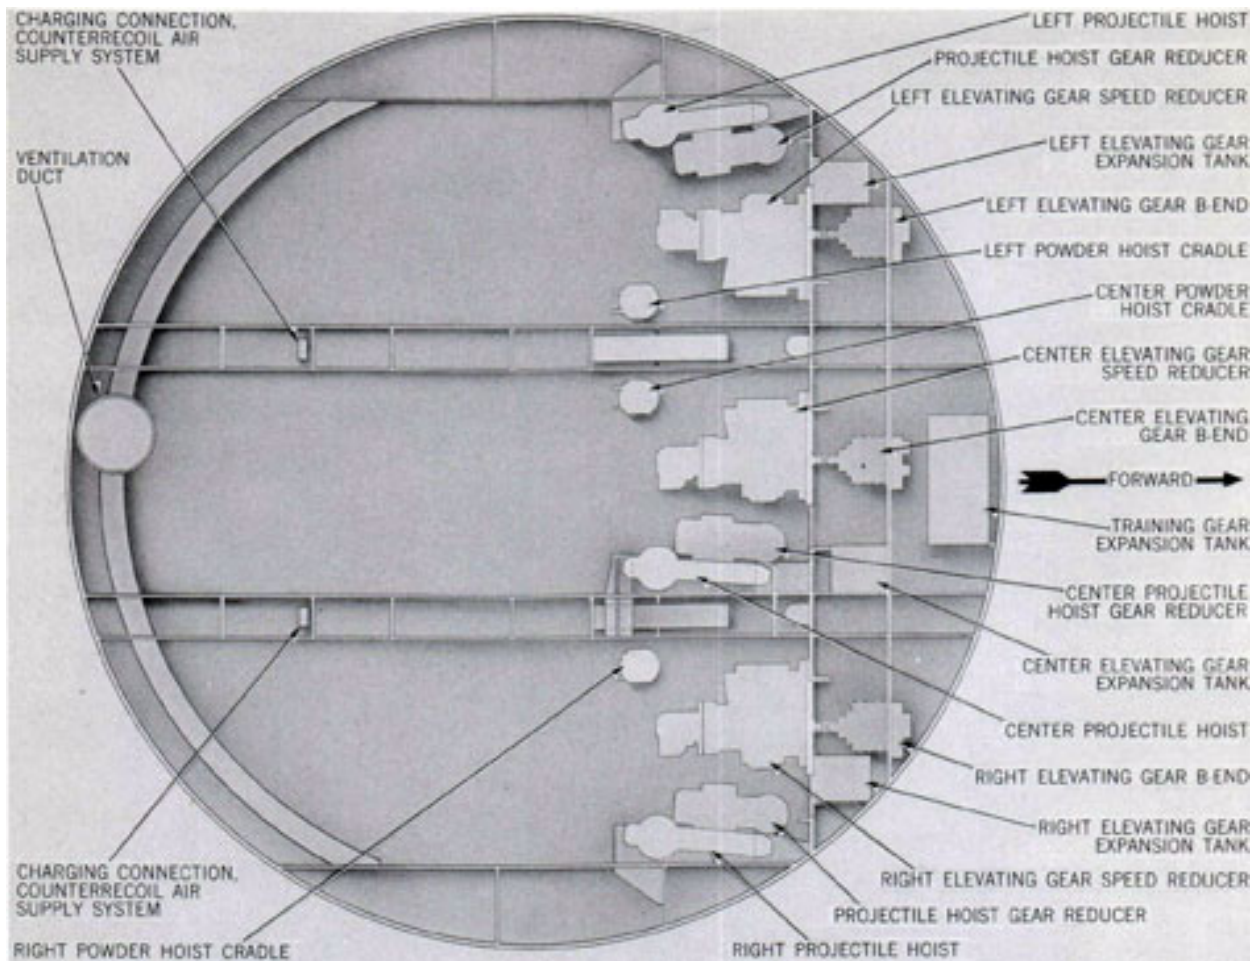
Ordnance Equipment Above Pan Plate. General Arrangement. Plan View
